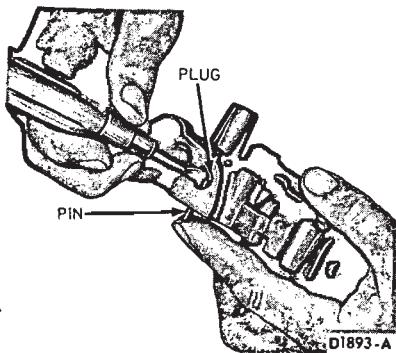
Removing or Installing Throttle Booster Valve—C4 Automatic—Falcon
